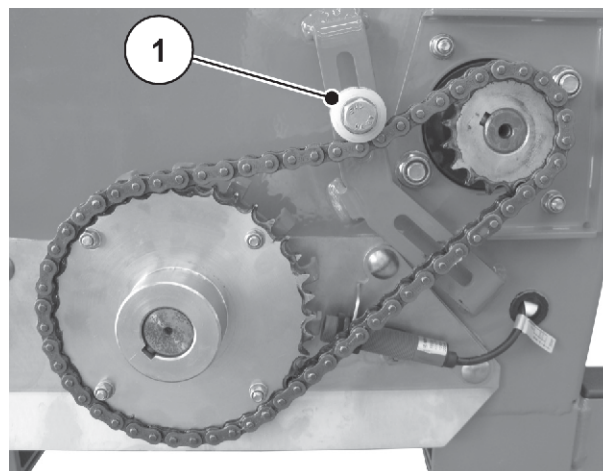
Installation of the chain tensioner roller (for a power take-off drive rotating anti-clockwise)
